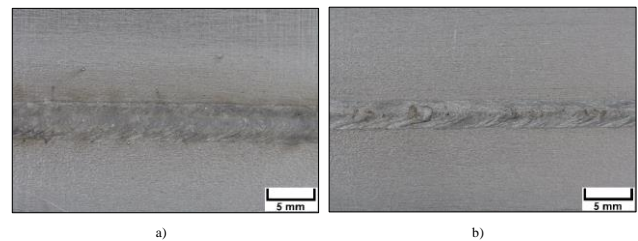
AW2099 alloy weld: a) weld surface b) weld root
